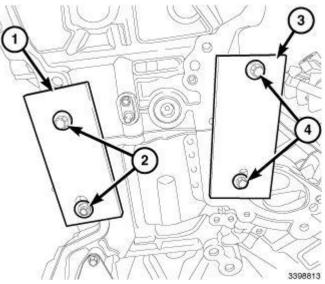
Cylinder Head Alignment Tools & Bolts Courtesy of CHRYSLER GROUP, LLC
